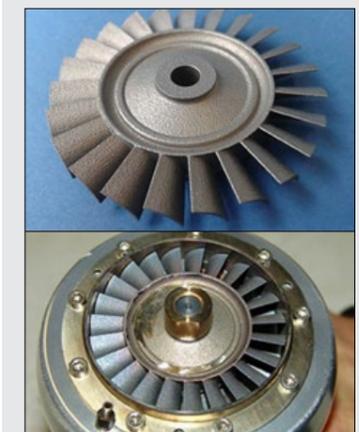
The turbine rotor has an outer diameter of 68 mm (top). Lower image shows the mounted turbine rotor
